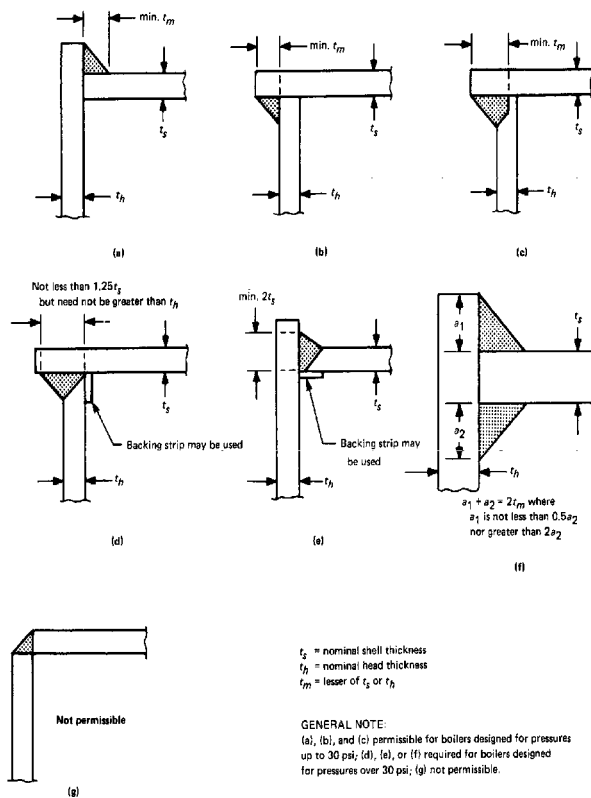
SOME FORMS OF ATTACHMENTS OF PRESSURE PARTS TO FLAT PLATES TO FORM A CORNER JOINT (TEE JOINT)
